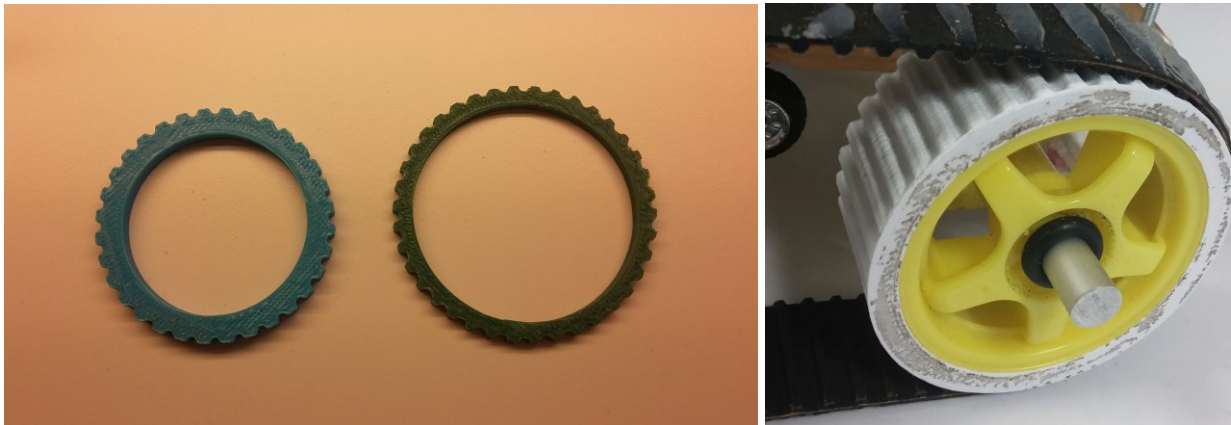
On the left first two preliminary 3D printed gears, on the right final 3D printed gear.
